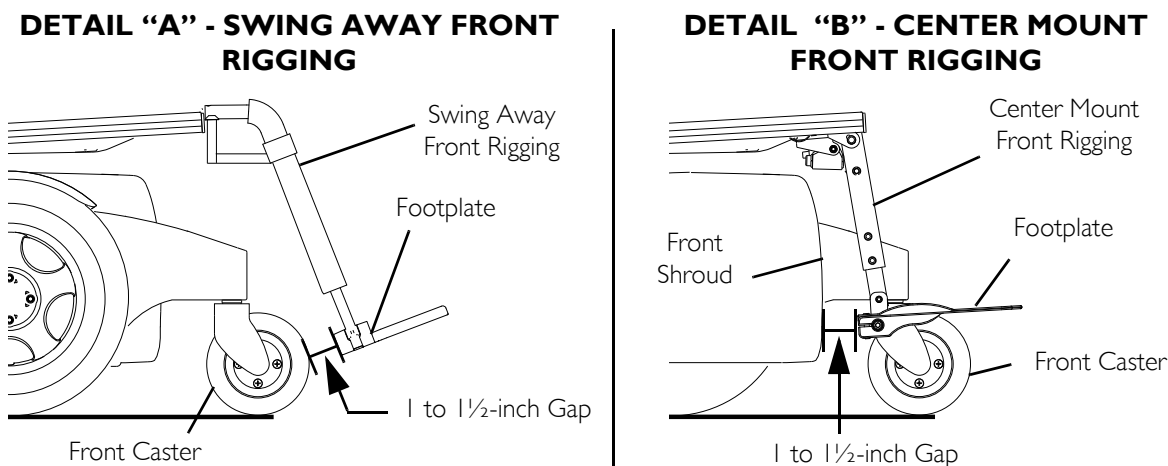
Checking Formula CG Seating System Mounting Position
